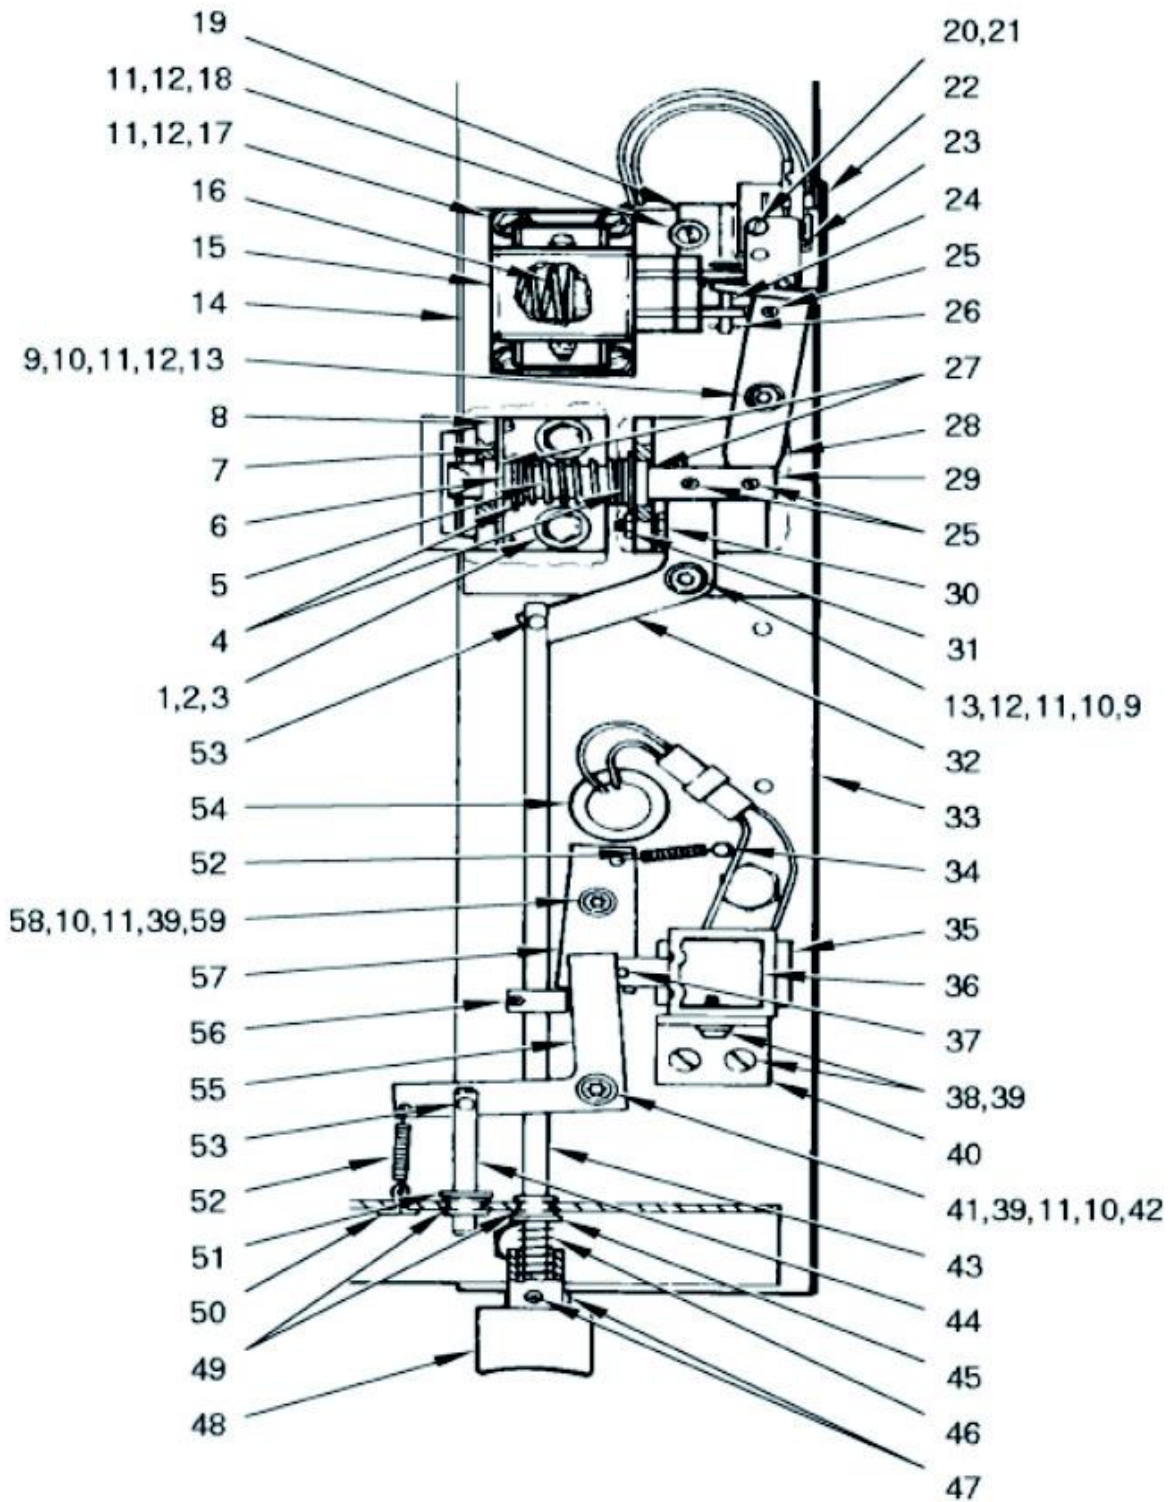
RC5C PLUS Door Interlock Assembly (Part A)
